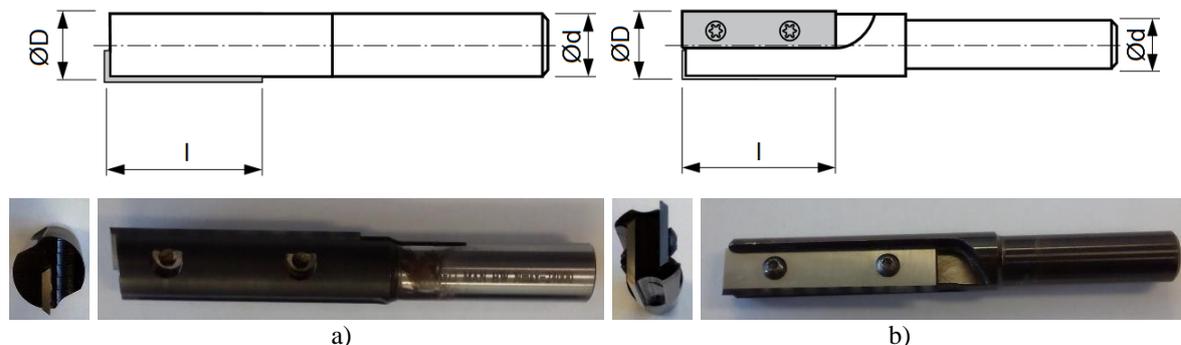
milling cutter used in the experiment a) with one reversible blade b) with two interchangeable blades (ØD - diameter operation, I - working length, Ød - clamping diameter).
